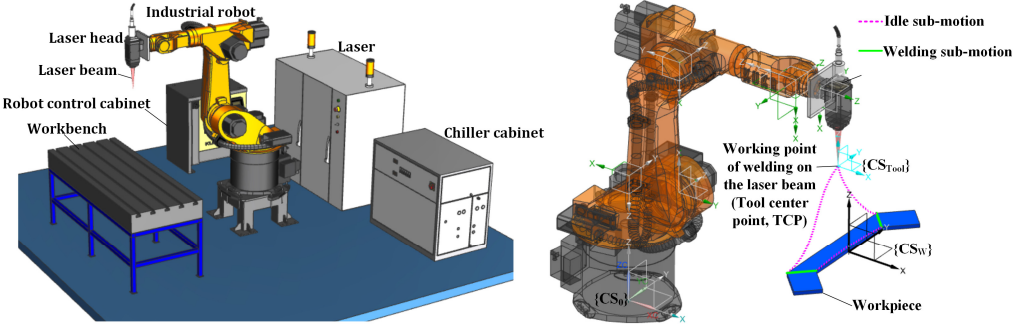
The basic set-up of a typical robot laser welding system and a case of workpiece welding
